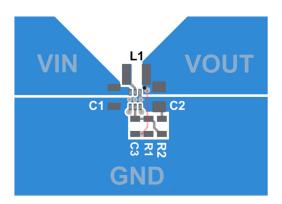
TPS62A02x-Q1 PCB Layout Recommendation
